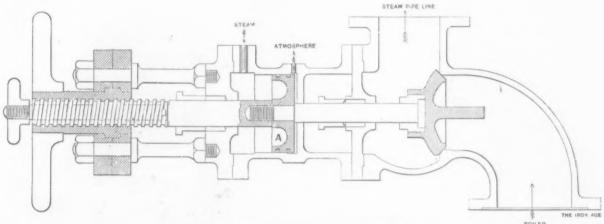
Steam Closing Stop Valve, Usual Form.
